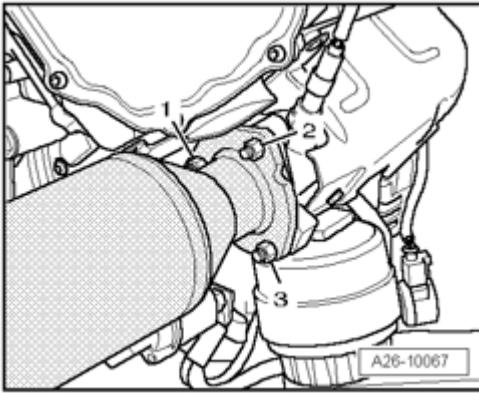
Removing Catalytic Converter With Front Muffler From Exhaust Manifold
